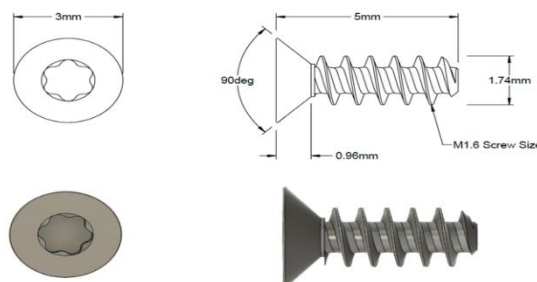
Technical drawing of third screw (a) top view (b) side view.
